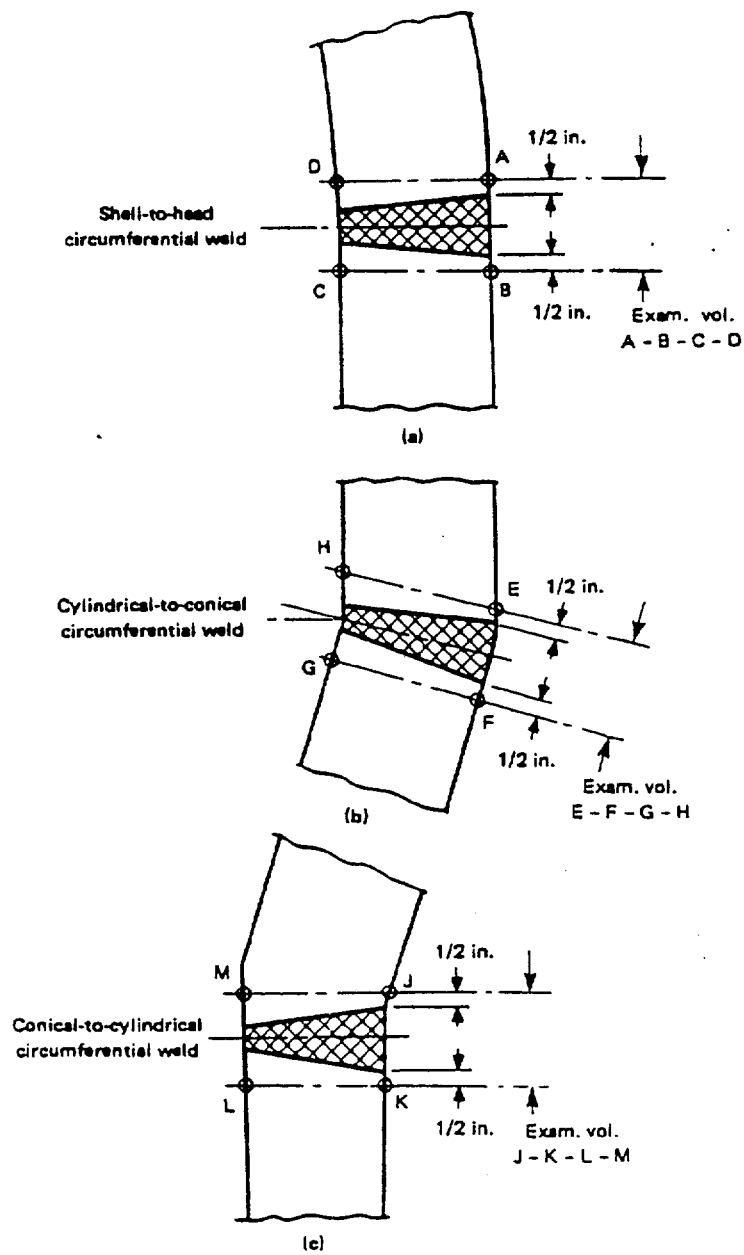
VESSEL CIRCUMFERENTIAL WELDS
